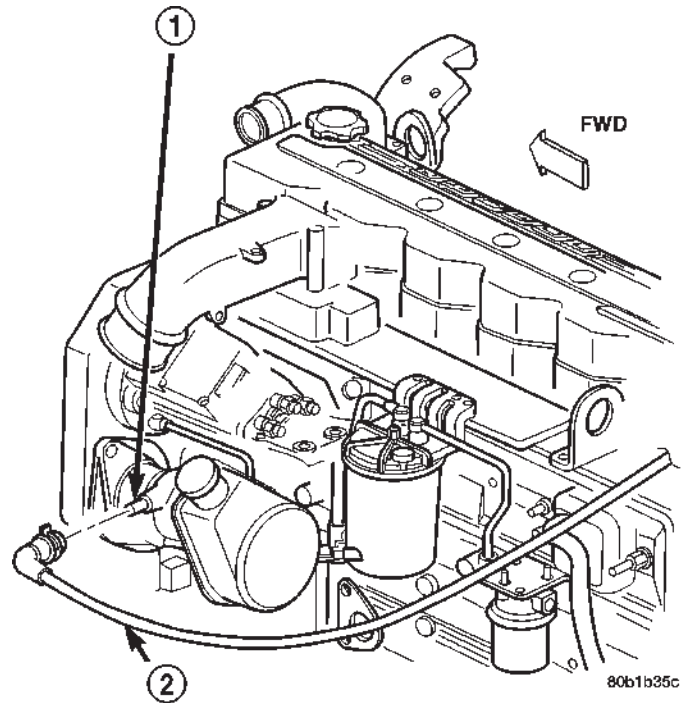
VACUUM CHECK VALVE - DIESEL ENGINE
